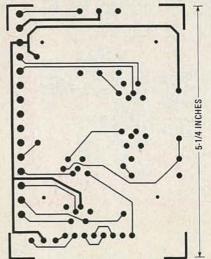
FOIL PATTERN for bottom of telephone adaptor board.
